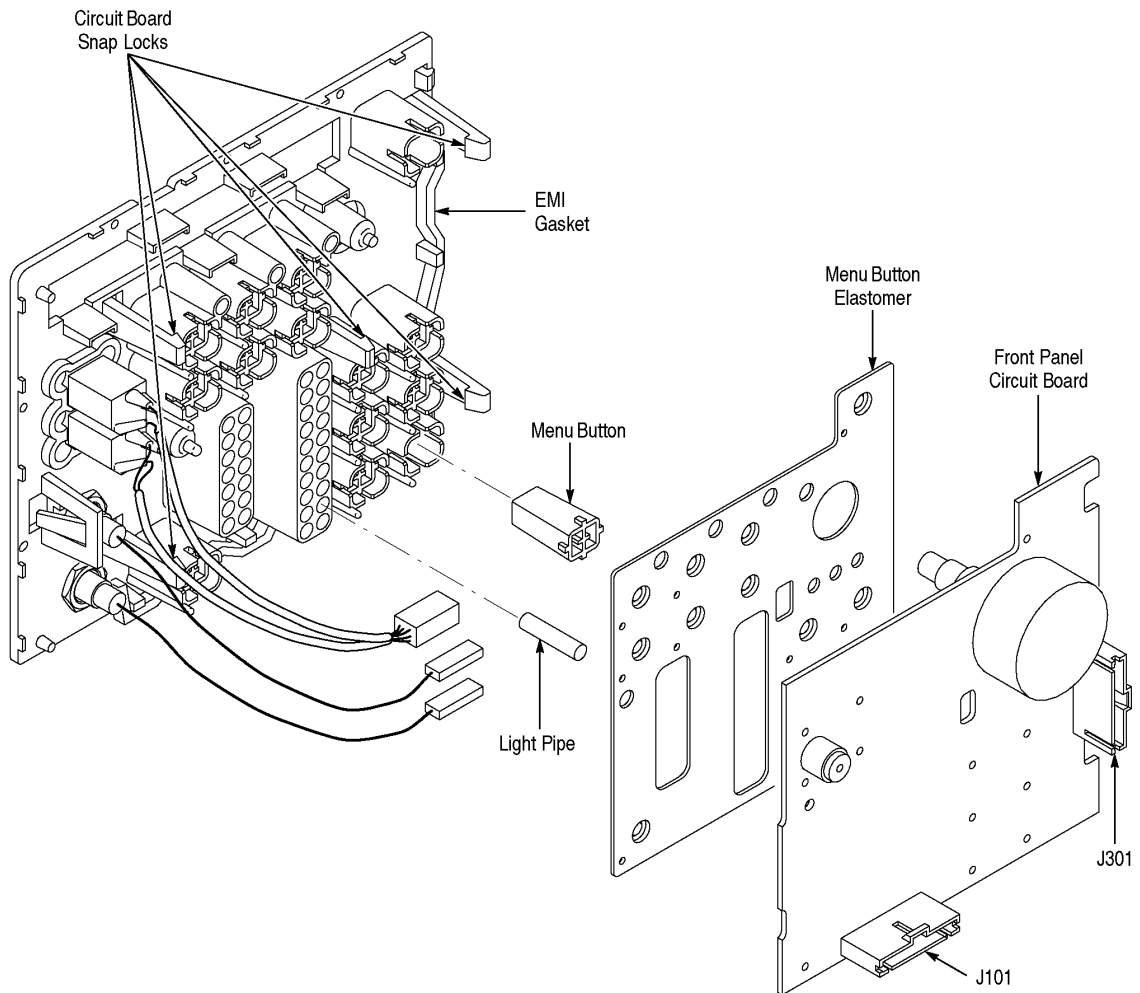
A06 Front Panel Assembly and Menu Flex Circuit Removal
